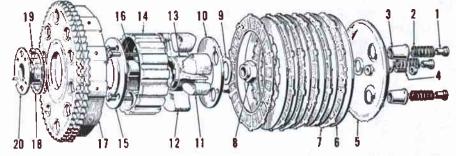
Exploded view of the clutch assembly. Refer to Fig. TM3-28 for installation of rubber cushions (11 & 12).
